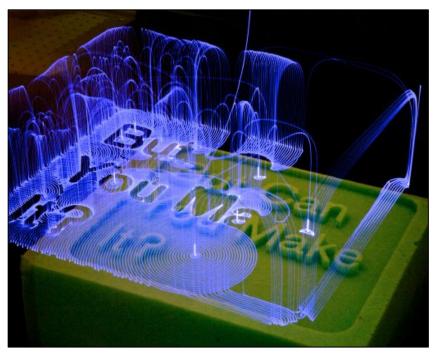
A milled urethane foam sign, along with some of the tool paths used to mill the sign. The tool paths were illuminated using a light mounted to the milling effector and a long-exposure photograph.
